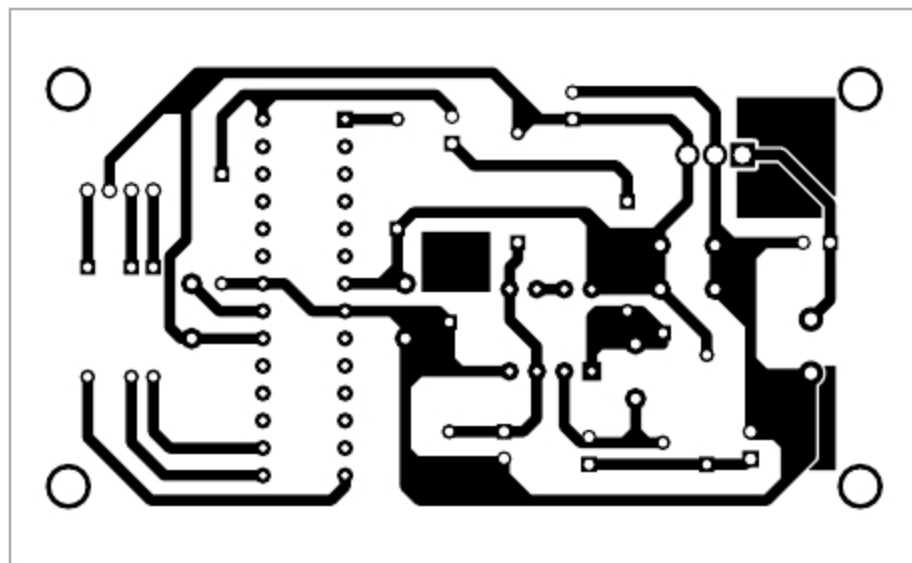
Actual-size PCB layout of music-operated RGB LED
